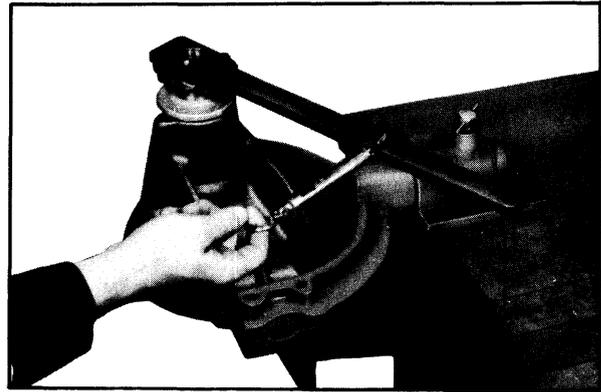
Measuring Bearing Preload With Spring Scale
